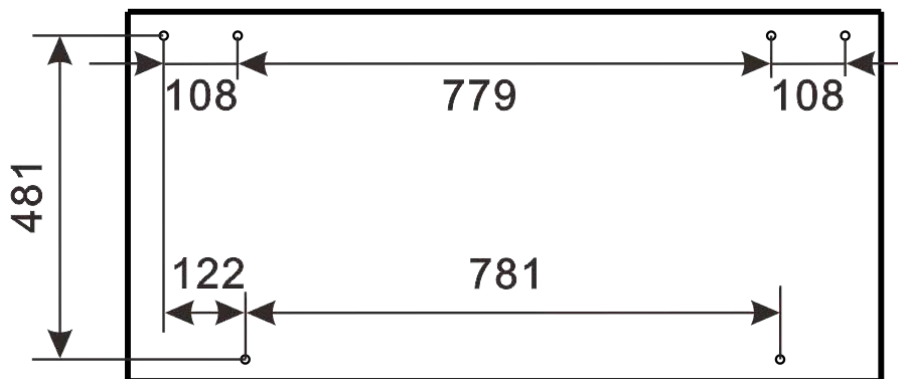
Dimensions of the inverter mounting backplane (unit: mm)
